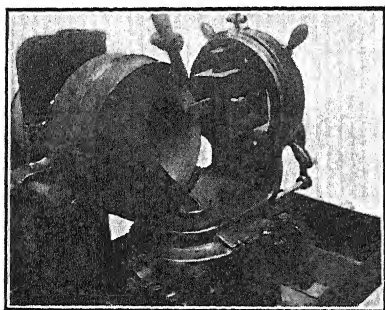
Third Position of Tool for Grinding the Side Relief.
